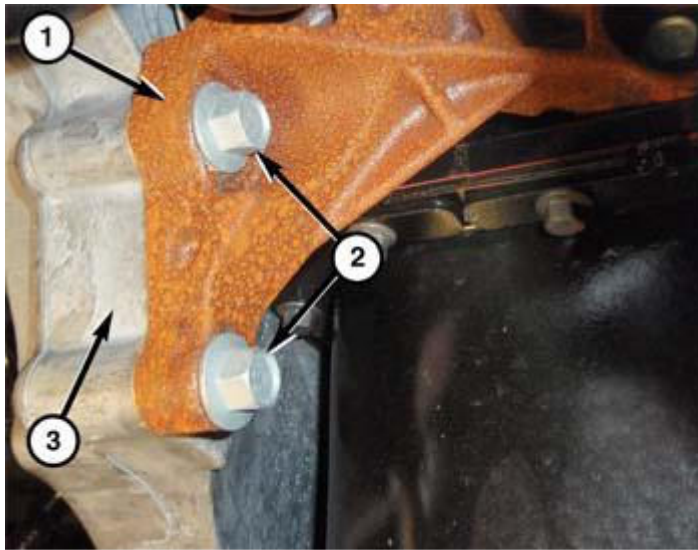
Right Engine Block Stiffener, Bolts & Engine Block
